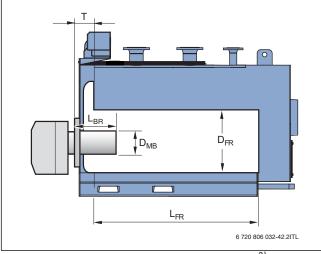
Dimensions, burner door and burner Uni 3000 F²⁾
